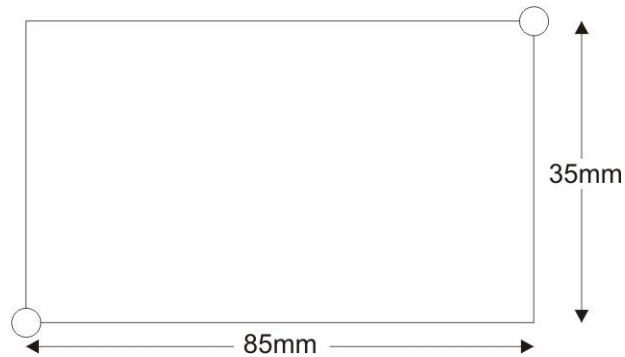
Mounting holes dimensions details of Temperature Transmitter
